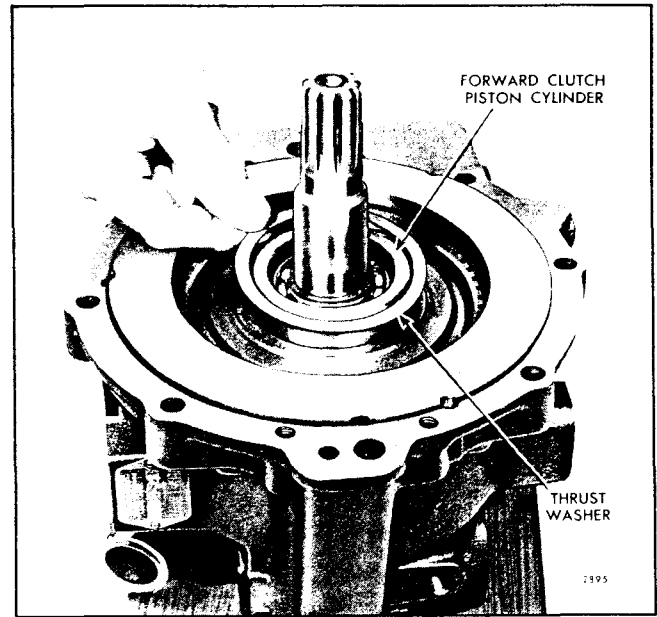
Installing Forward Clutch Piston Cylinder Thrust Washer
